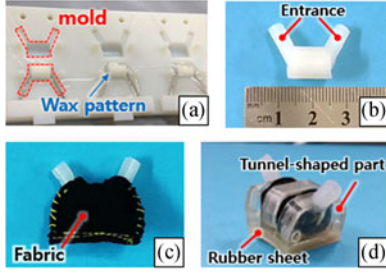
Actuator module fabrication process. (a) Polymer tube molding process. (b) Polymer tube. (c) Tube covered with fabric. (d) Combination of tube and outer shell (DIP and PIP module).
